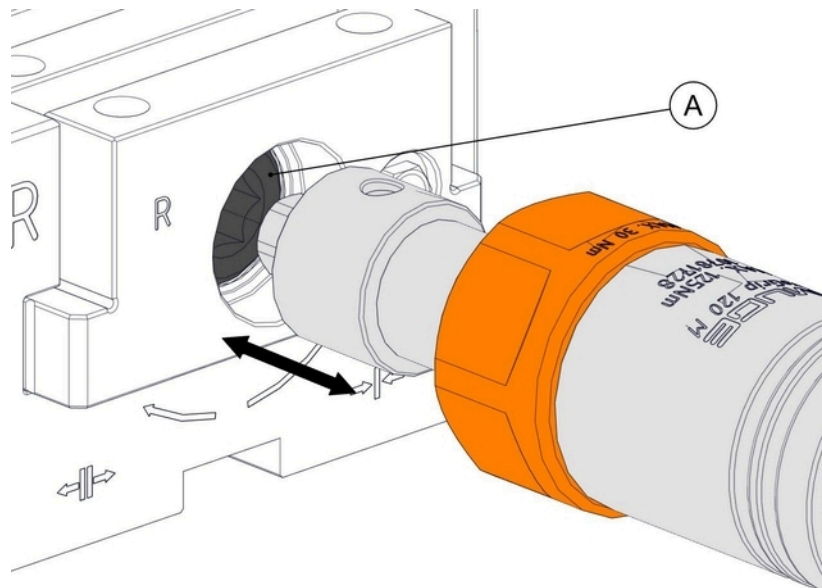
Schematic illustration: Interface of the screw shaft (hexagon socket)
